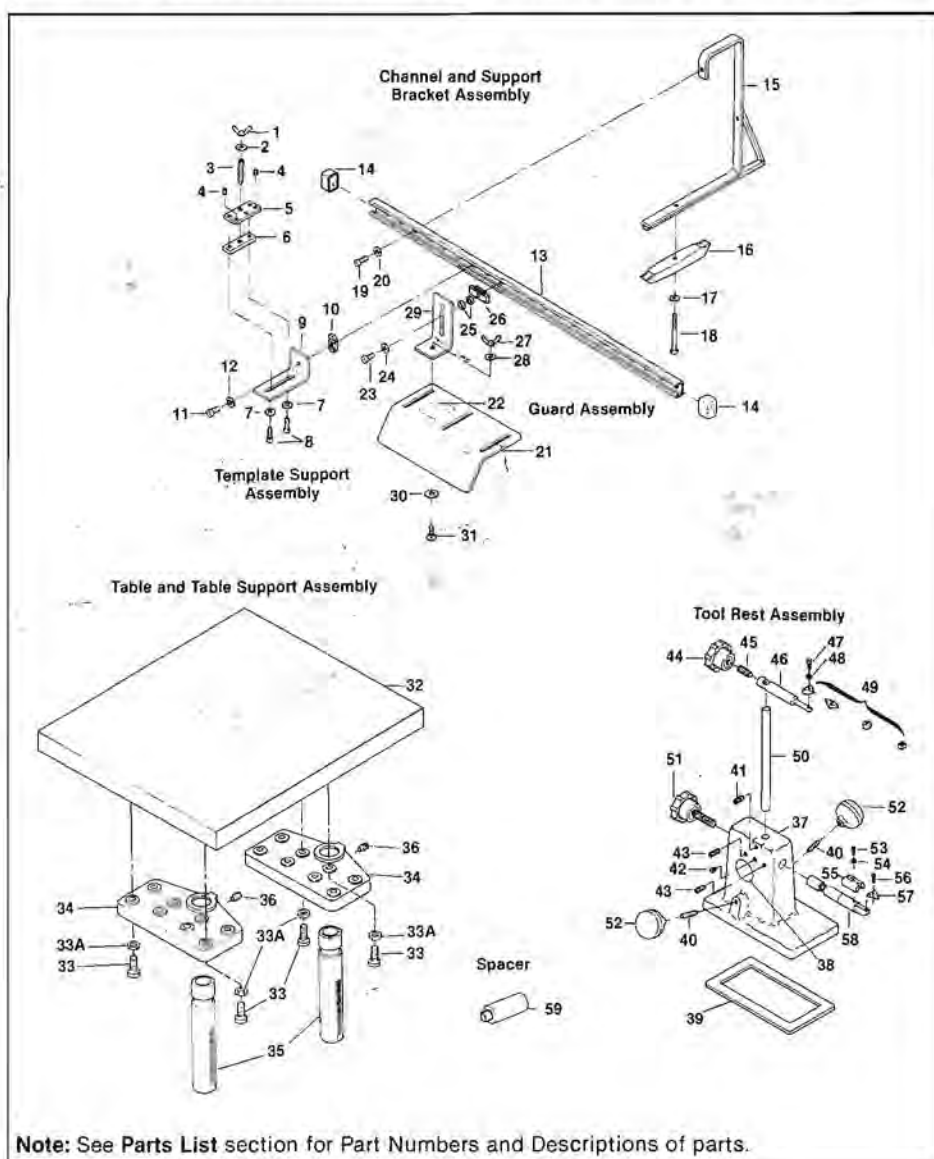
Attach the template support assemblies, the guard assembly, and the support brackets to the channel.
